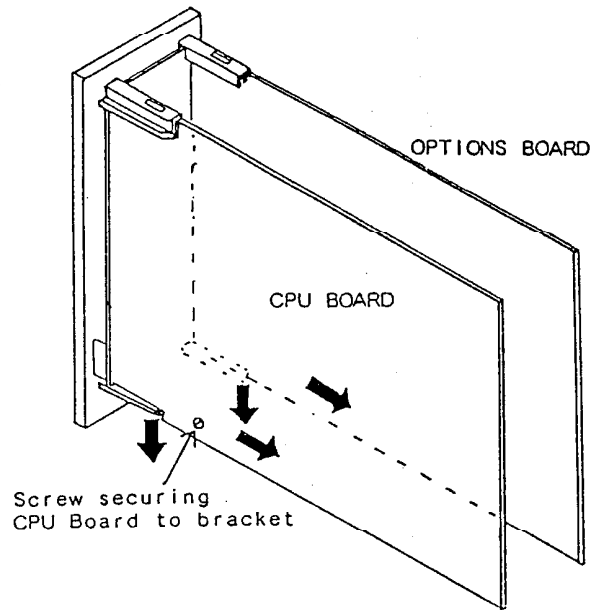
DETACHING THE PCBs FROM THE FRONT PANEL
